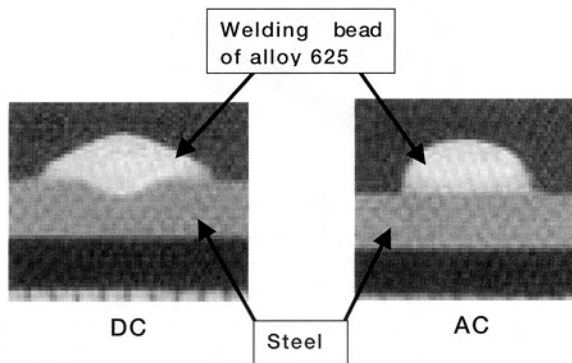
Weld sections of DC & AC-pulsed arc welding (Current 120A, Voltage 21V, Welding speed 300mm/min)
